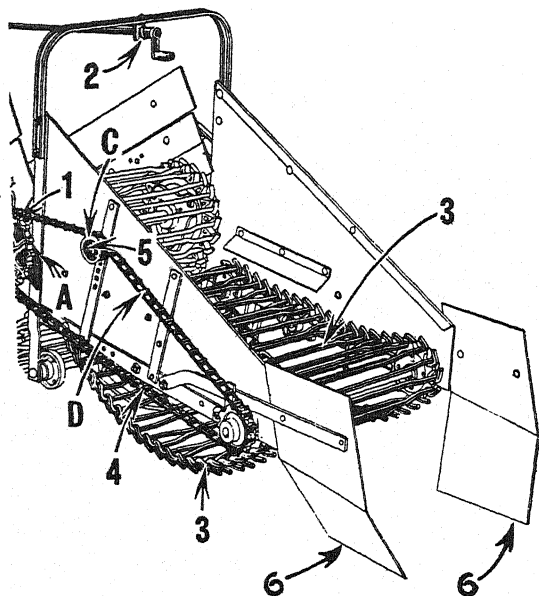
Extension elevator (3). Deflectors (6). Extension elevator adjuster (2). Drive chain (D). Chain adjuster (C).
